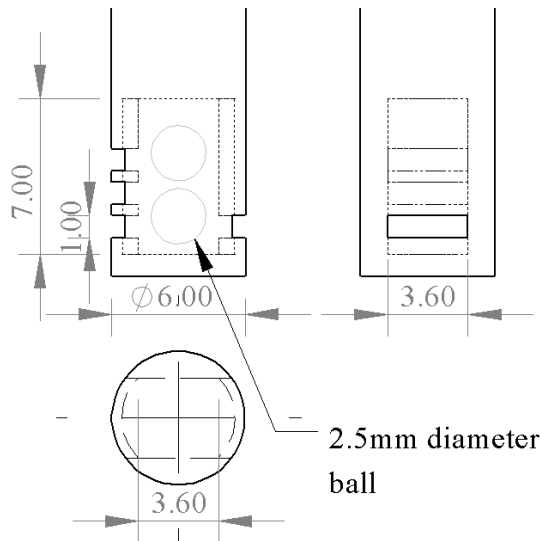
Dimension of the acoustic sensor probe in mm. Top left: Sideview illustrating the one-hole inlet and the three-hole outlet on the right and left of the probe respectively. Top right: Front view illustrating the one-hole inlet. Bottom left: top view of the probe.
